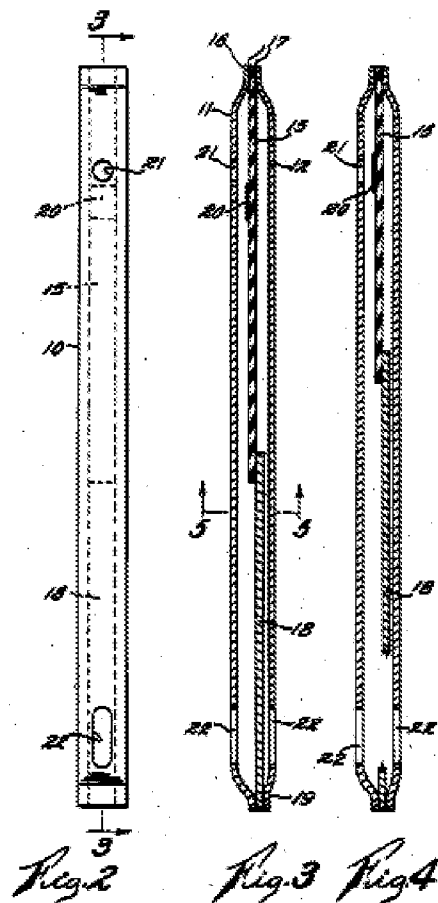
shows “a front elevational view of the accessory. Fig. 3 is a section taken on line 3-3 of Fig. 2. Fig. 4 is a section like Fig. 3 showing the parts of the accessory in indicating position” (Shaw, col. 1, ll. 22-25).
